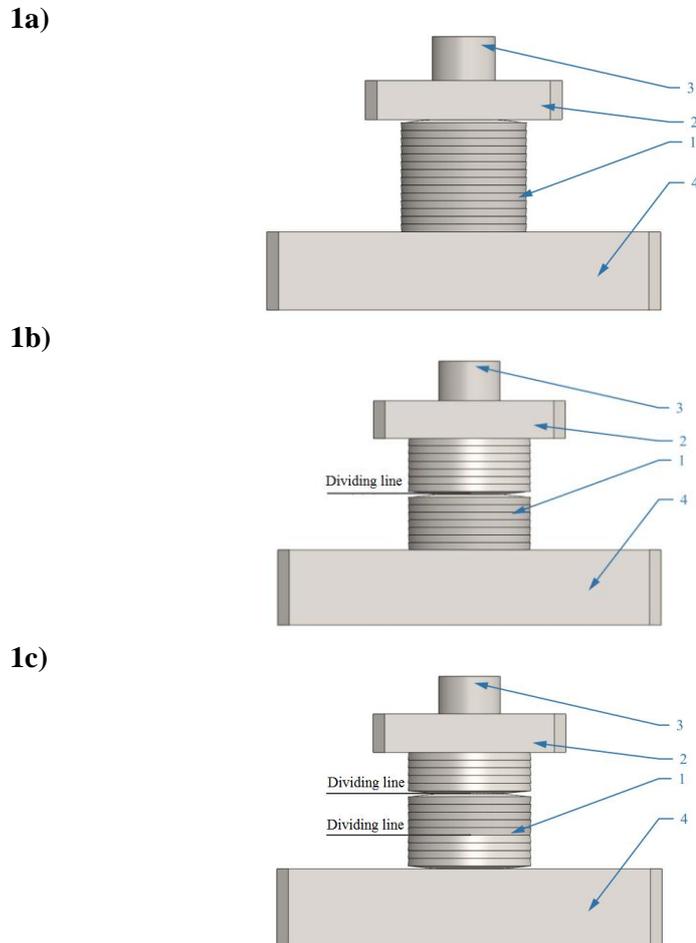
Models of disk spring packages designed in Solid Works: 1 – disk spring package, 2 – pusher, 3 – guiding bolt, 4 – base, a) configuration 14V, b) configuration 7V7, c) own study
